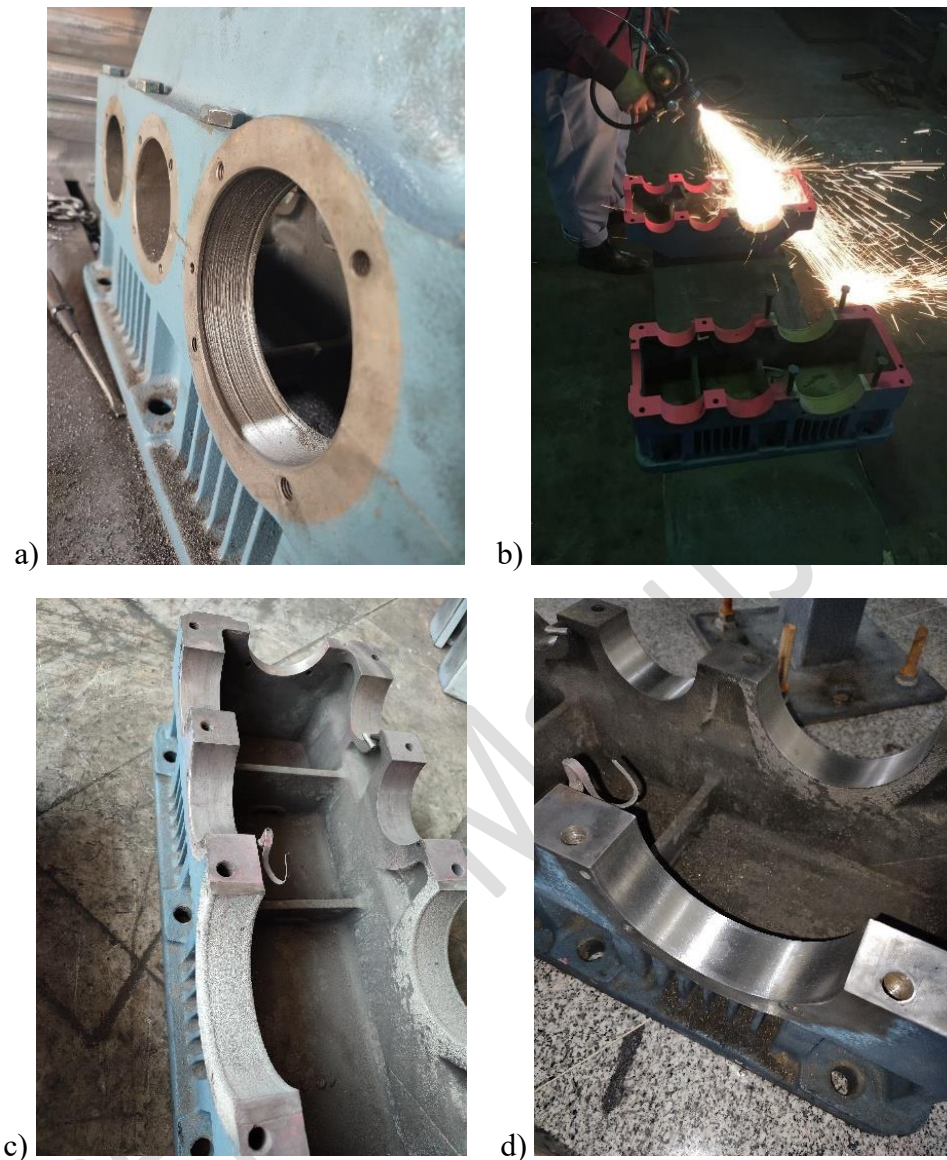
Metal spray welding process: a) Undercutting, b) Metal spraying, c) Welded area, d) Final area (after final machining)
